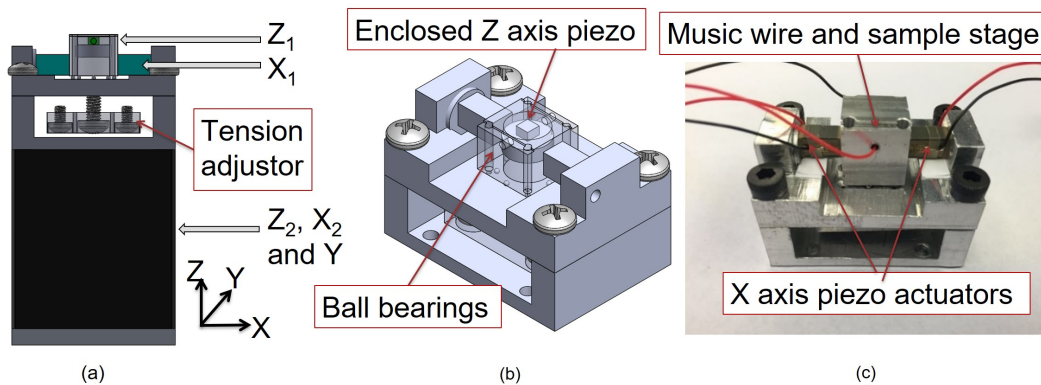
Music wire multi-actuated scanner design: (a) front view of CAD design with axis labels, (b) isometric view of the scanner CAD design, (c) picture of the implemented scanner in the lab
